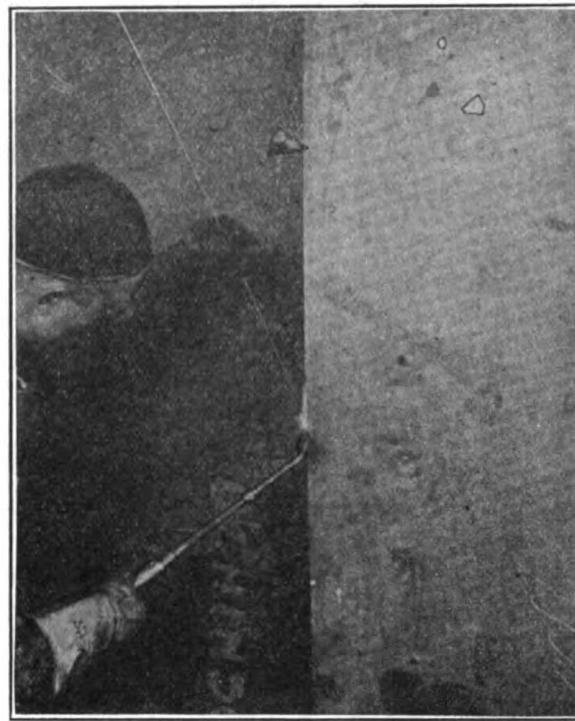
Relative positions of rod and torch when welding down a vertical seam.
